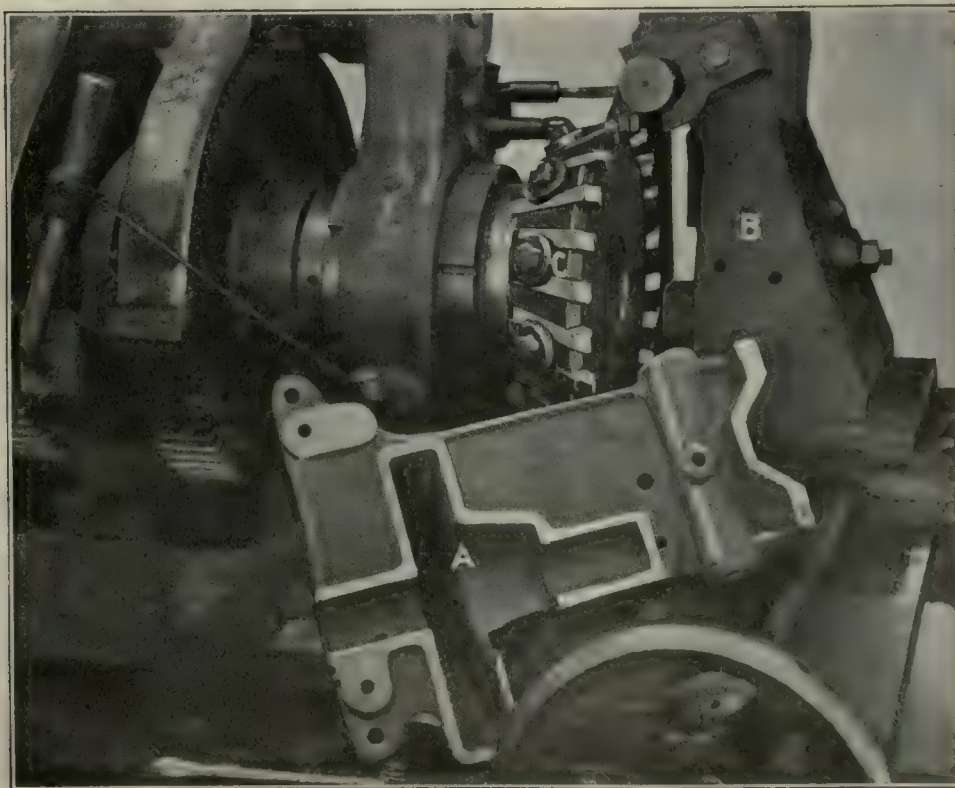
SPECIAL MACHINE FOR MILLING AND DRILLING BASE
